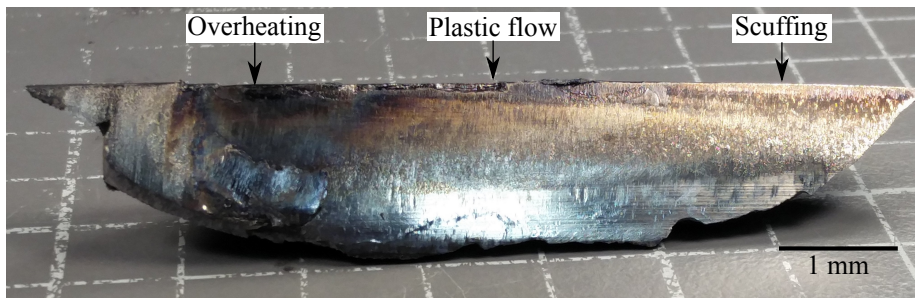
Broken gear tooth retrieved from the intermediate stage of an industrial wind turbine showing different damage mechanisms.
